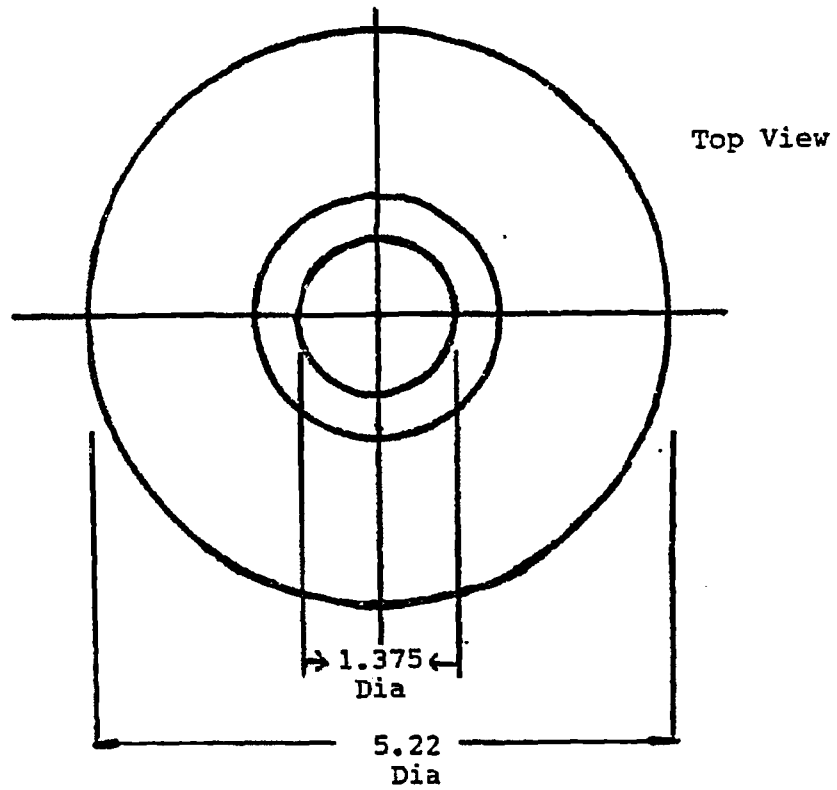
Top view of the inner Mu metal shield (see Photograph A.39).
